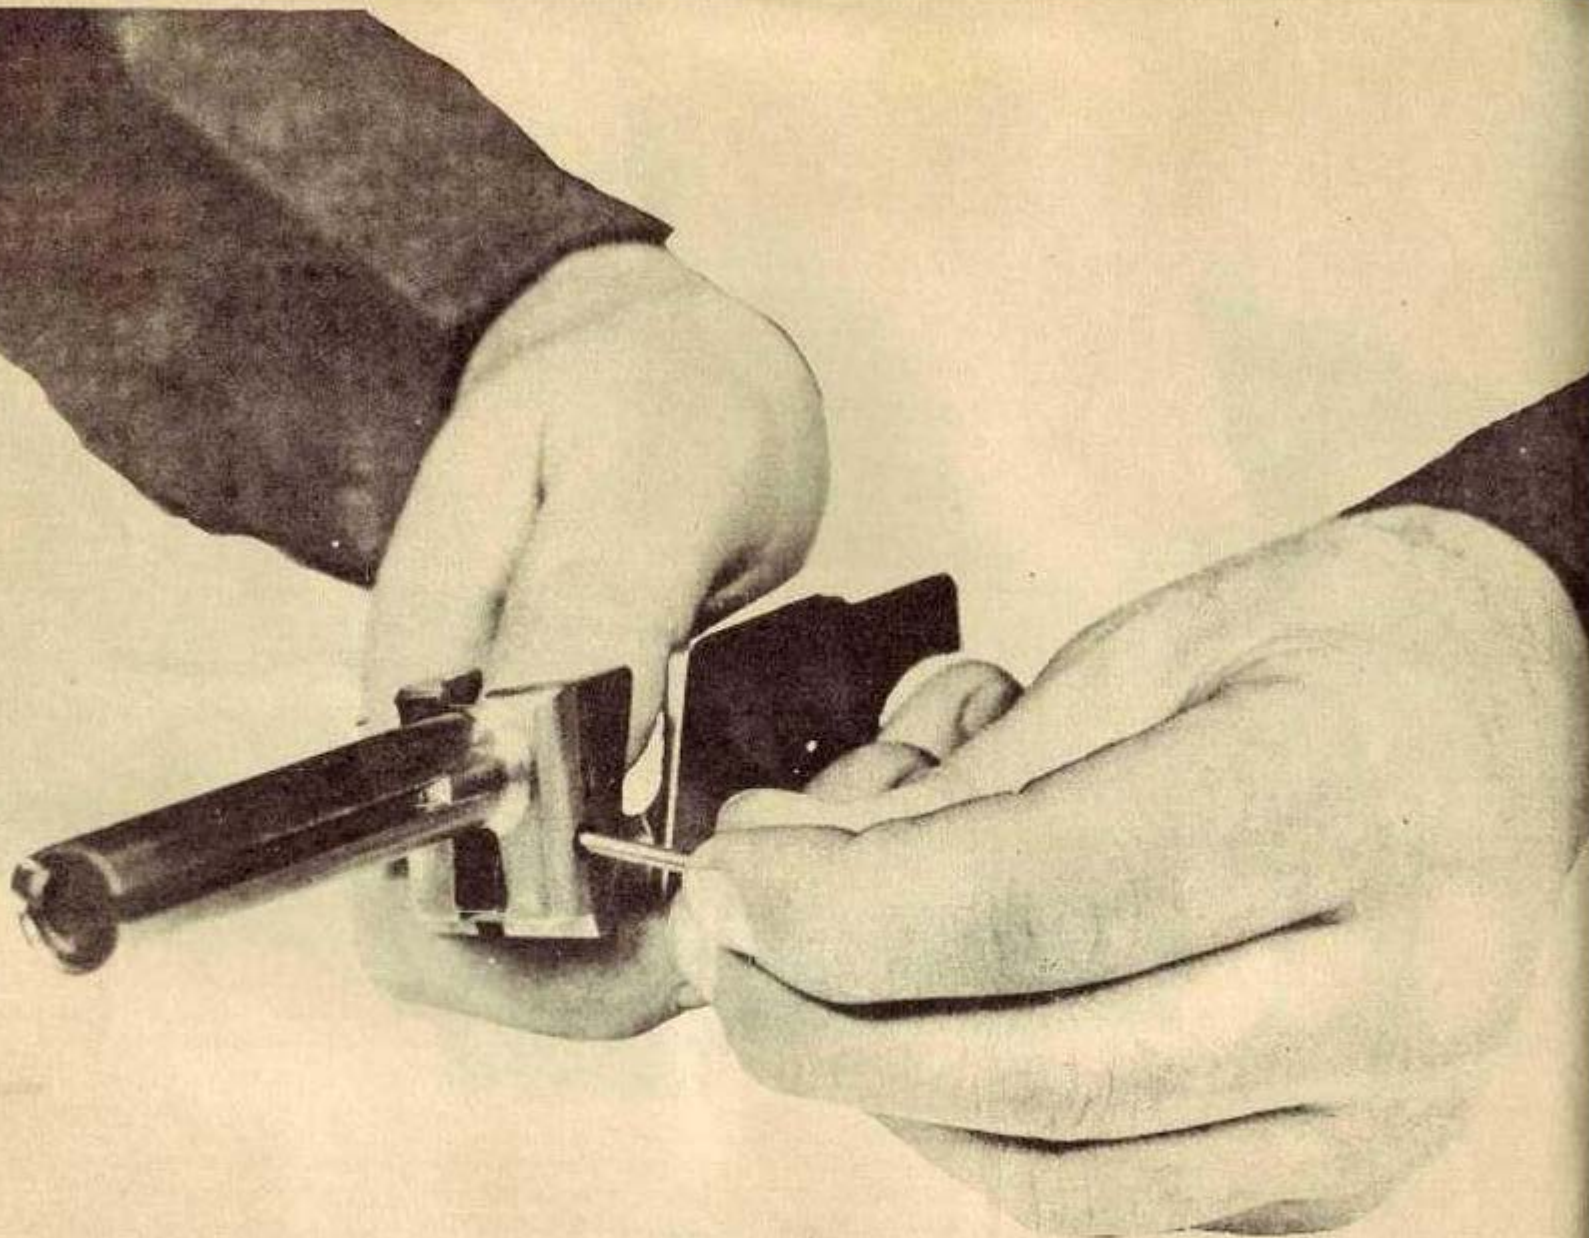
Hold the bolt as shown, (with the thumb applying pressure to the back of the HAMMER, in order that the FIRING PIN and SPRING will not spring away, and drift out the HAMMER PIN (from either side.) Remove FIRING PIN and SPRING.
